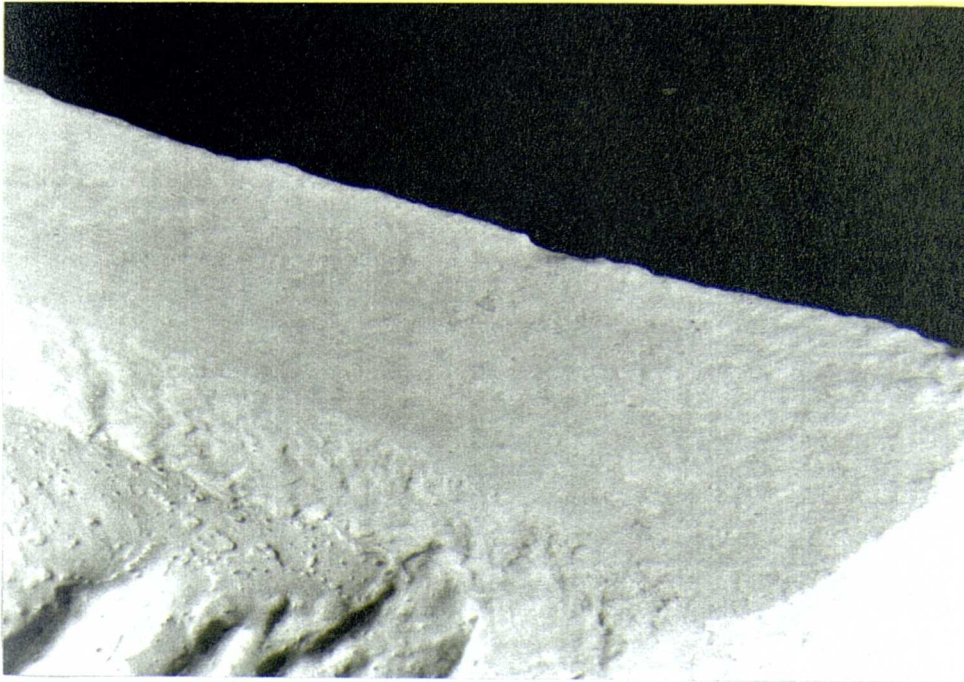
A close-up photograph of an experimentally generated fresh fracture showing the smooth nature of the fracture surface
